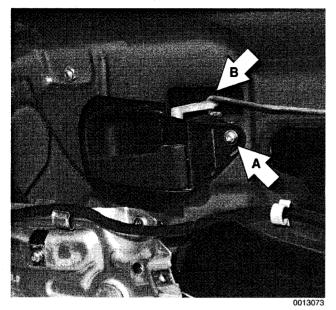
Inside door handle. Remove screw A, then unhook from rod B.
